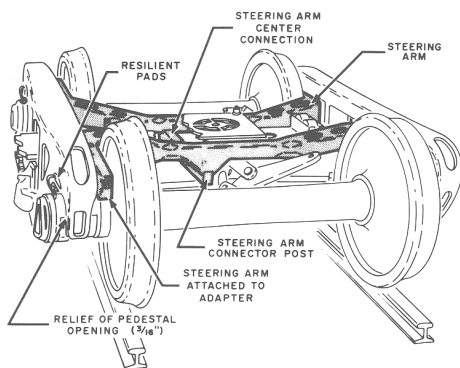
General arrangement of truck equipped with DR-1 steering assembly.
